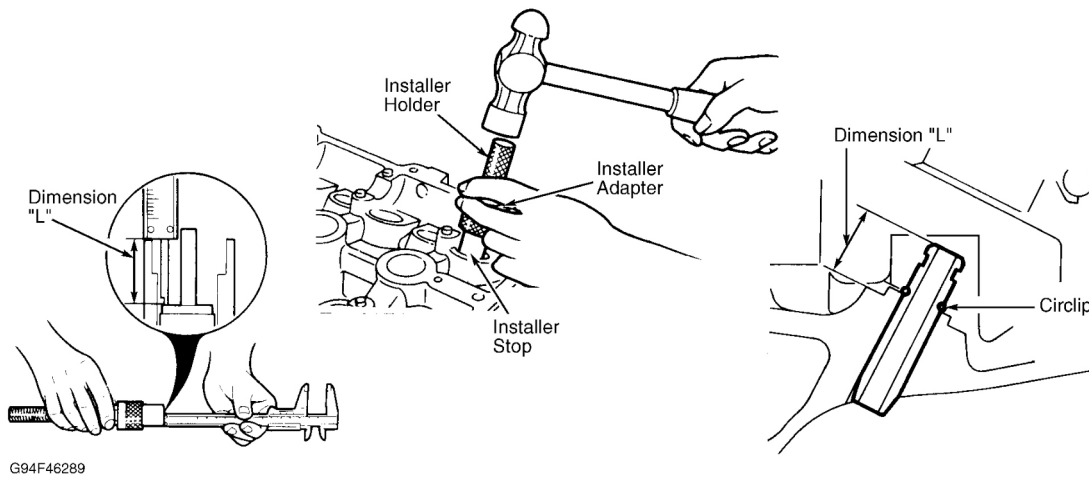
Adjusting Valve Guide Installer & Installing Guide
